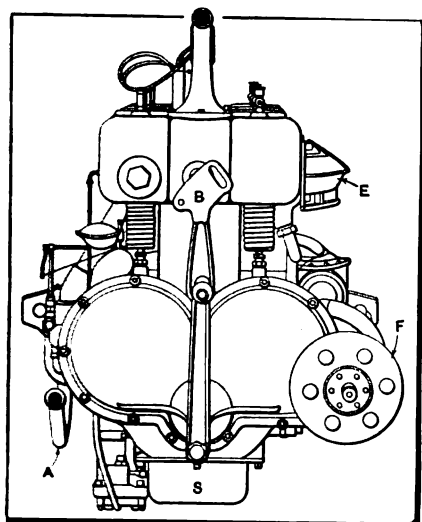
Front of the motor, showing the form of valve tappets used and method of securing the valve springs
